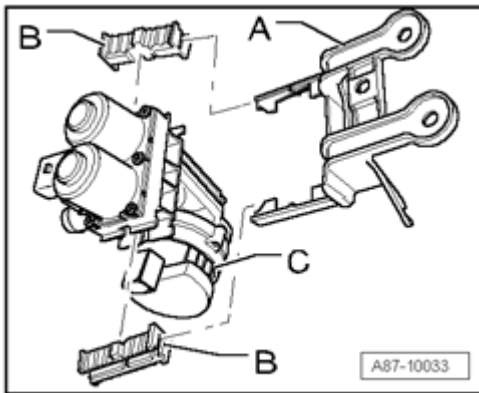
Identifying Holder, Rubber Elements, And Pump Valve Unit
